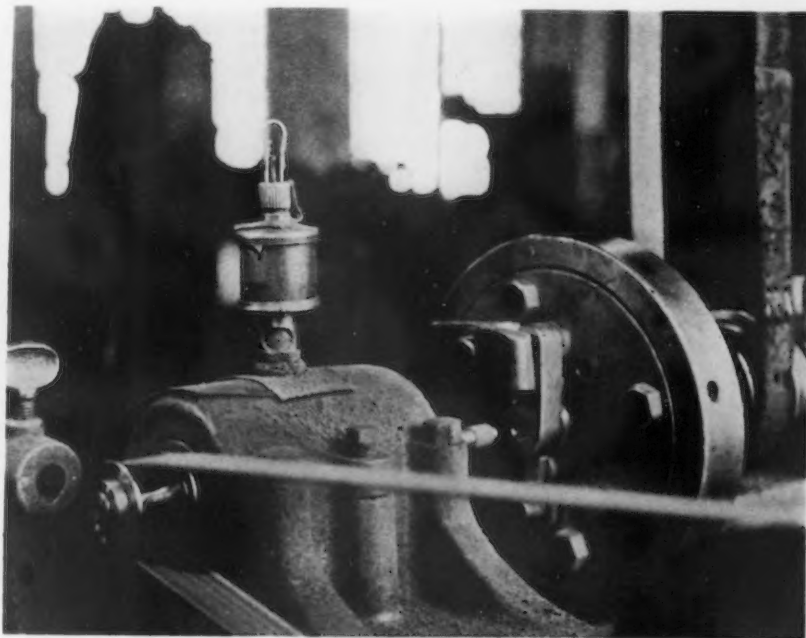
Internal grinding of a hardened steel roll jaw. The spindle carries a $\frac{1}{2}$ x $\frac{1}{2}$ -in. wheel and operates at 16,800 r.p.m.
